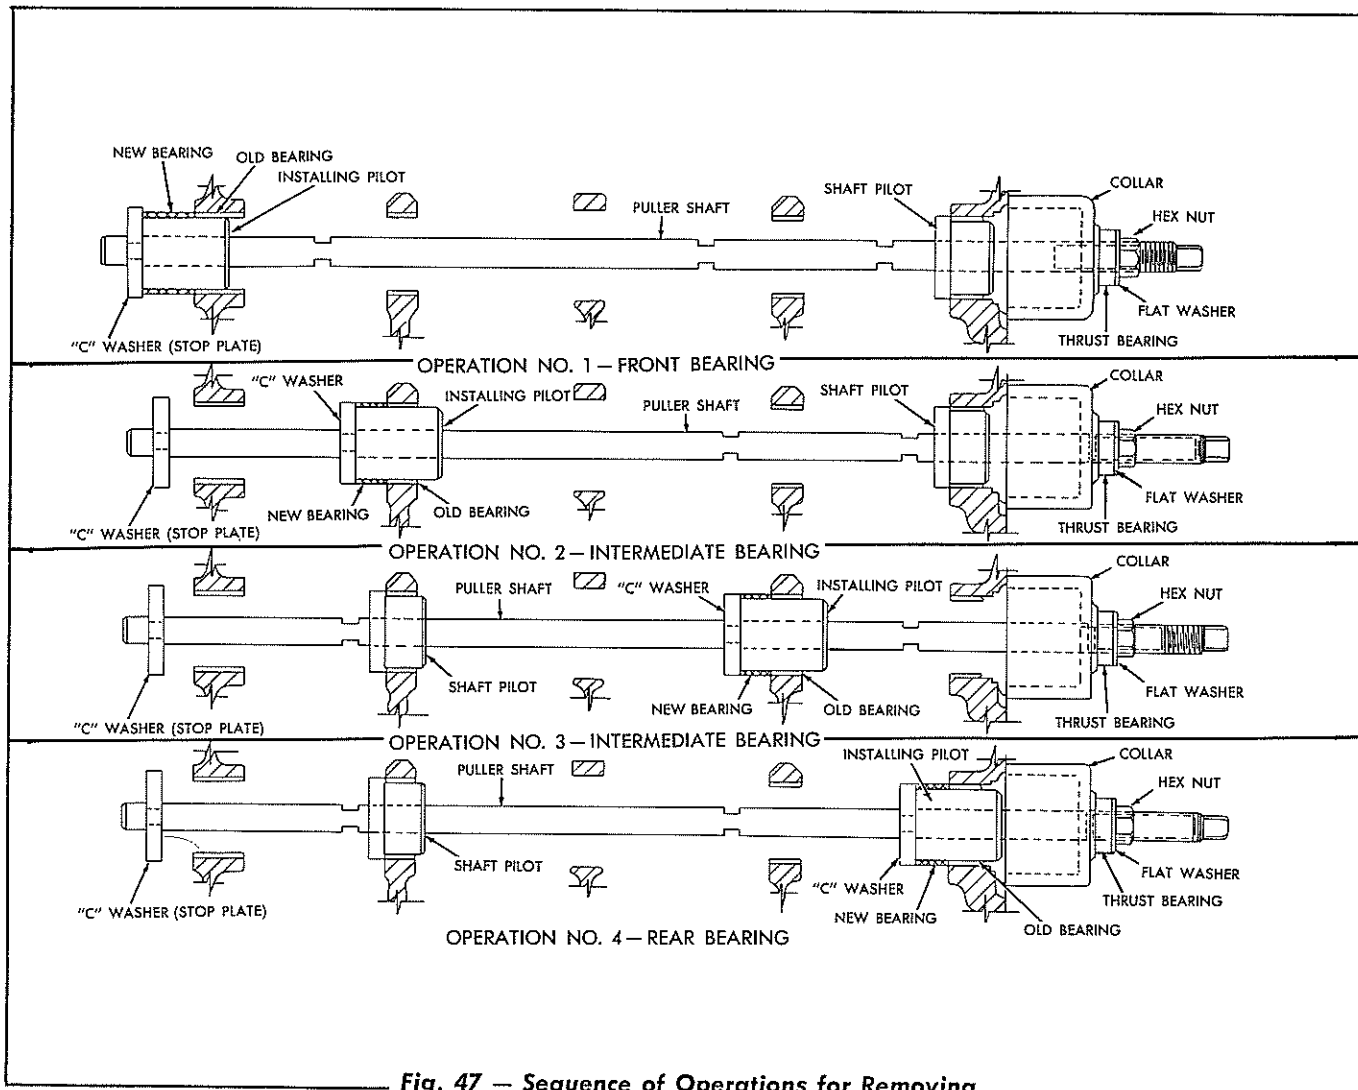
Sequence of Operations for Removing and Installing Camshaft Bearings
